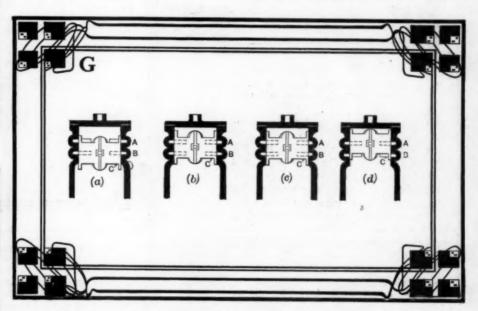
Fig. G-Section of the Reno slide valve engine showing induction, compression, firing and exhaust strokes respectively
